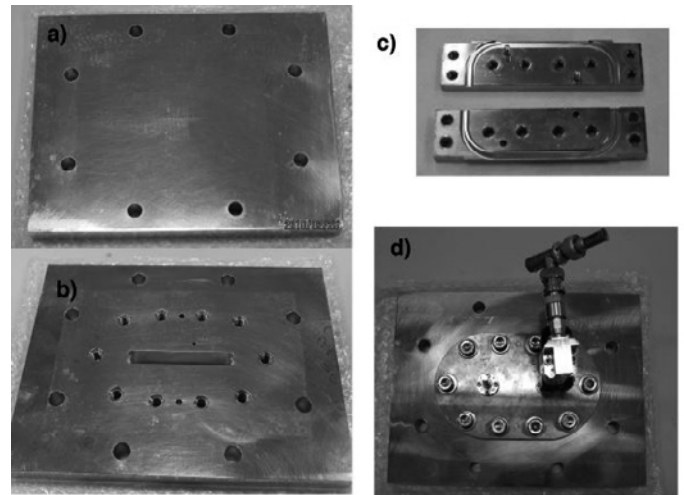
Photos of the improved power monitor, a) surface with multi hole array at center, b) backside with insert trench for sub-waveguide of the miter bend reflector, c) waferguide inserts and d) the outlook assembled as a power monitor.
